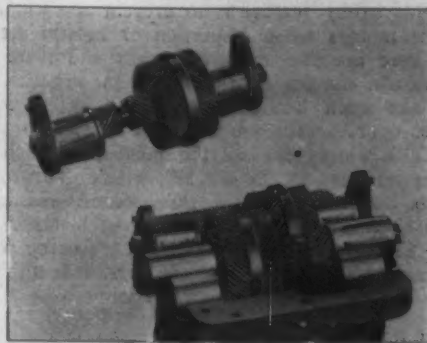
The Gear Partly Dismantled, Showing the Eccentric Bearings Employed.
